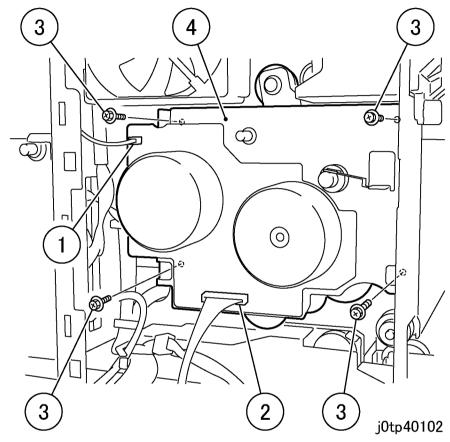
Removing the Main Drive Assembly (j0tp40102)
